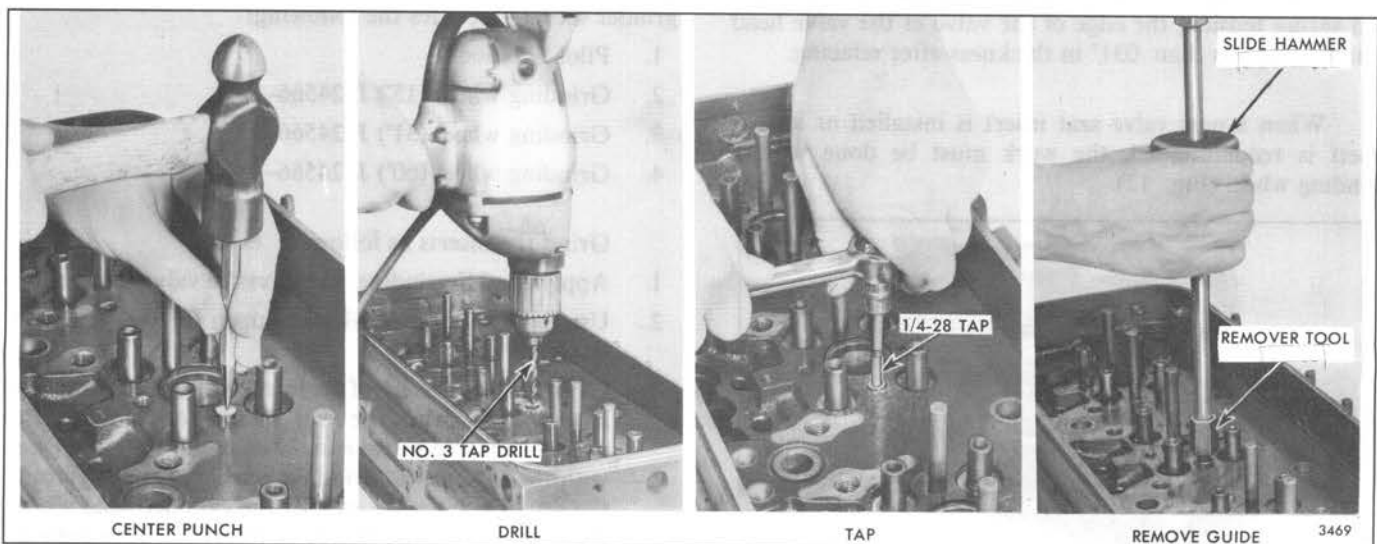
Removing Broken Exhaust Valve Bridge Guide with Tool J 7453 and Slide Hammer J 2619-01
